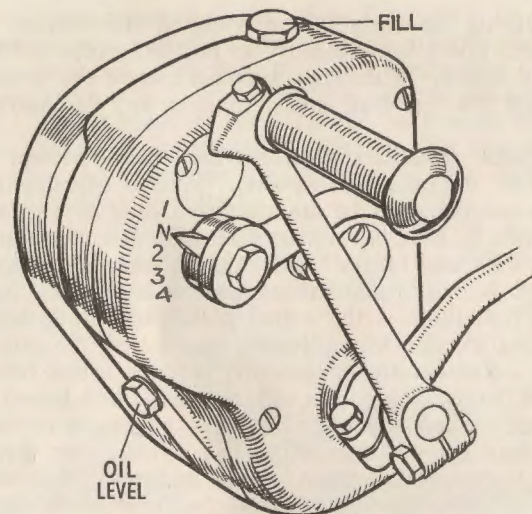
Showing oil filler and level plugs on gearbox. This illustration depicts the oil level plug at the back of the gear-box.
